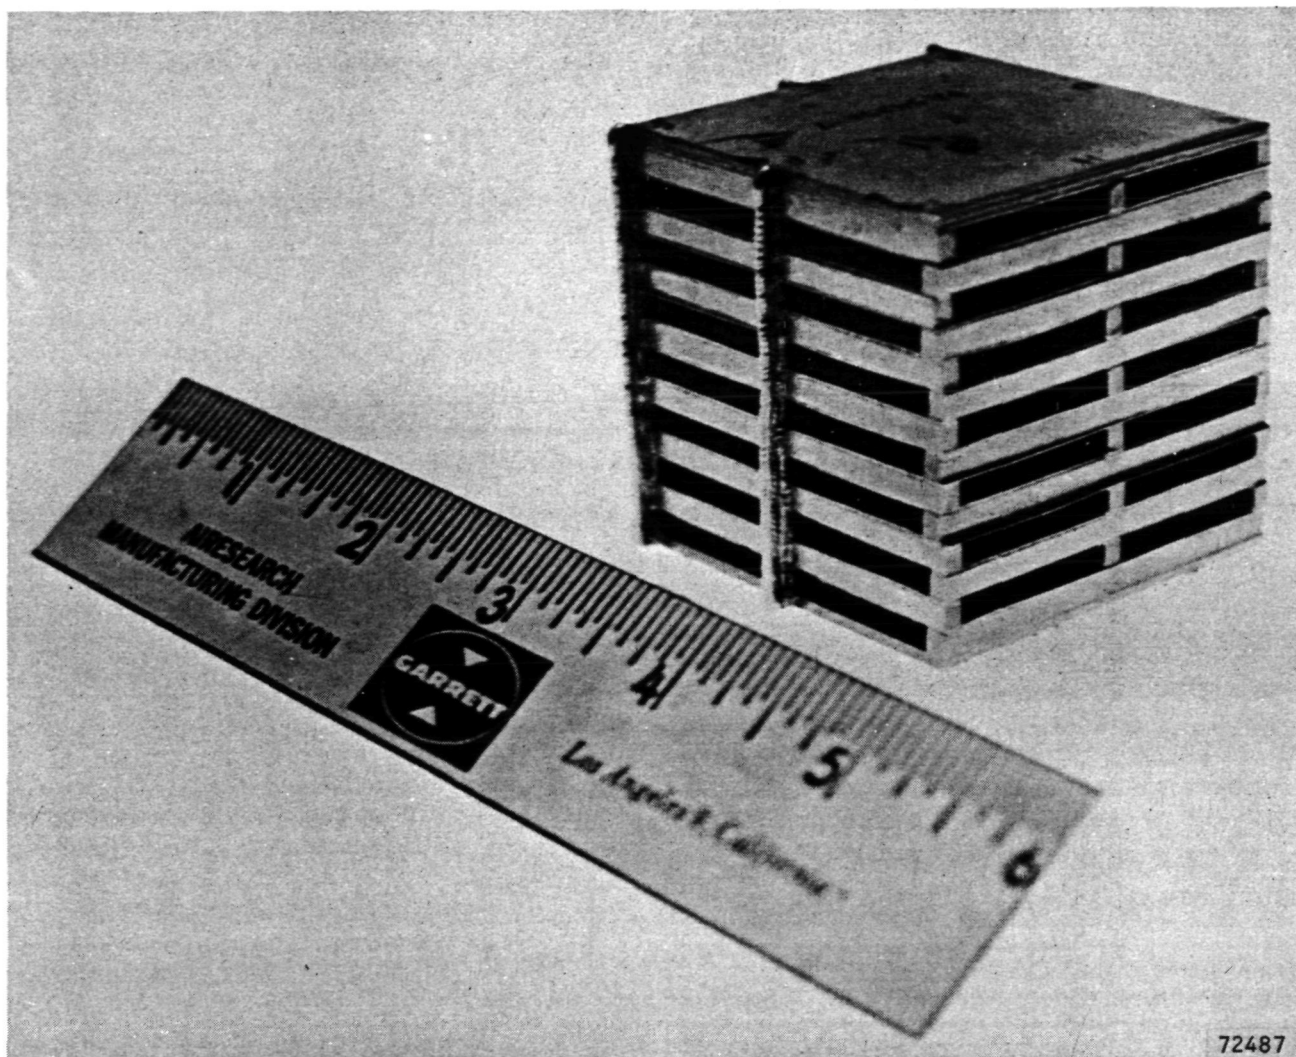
Plate-Header Bar Weld Test Sample
